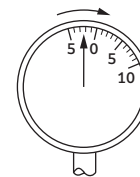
Adjustment for positive clearance (mounted internal clearance: +1.0 μm)
